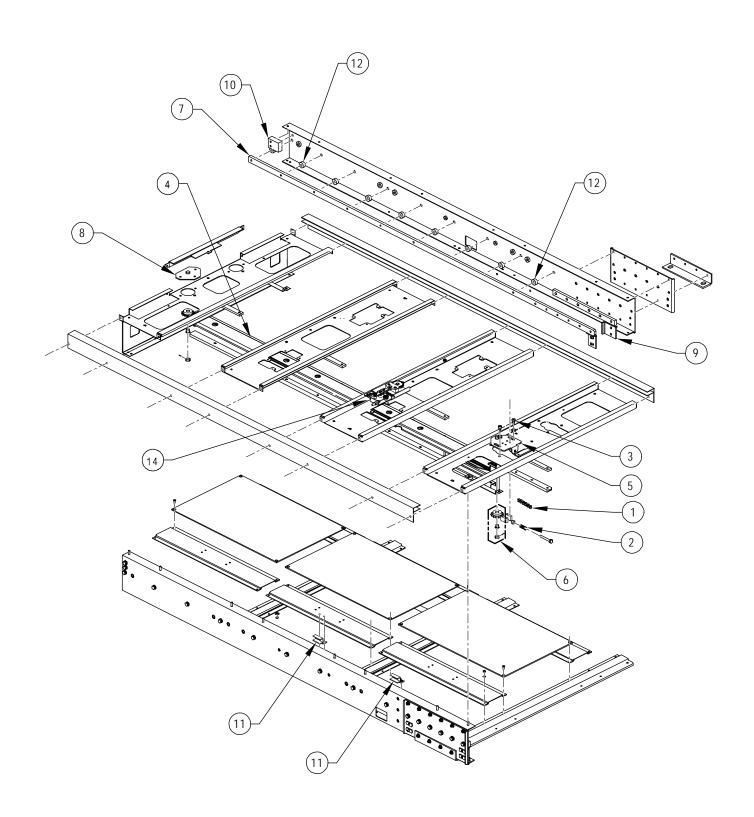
F10X-SERIES ENCLOSURE ASSEMBLY
